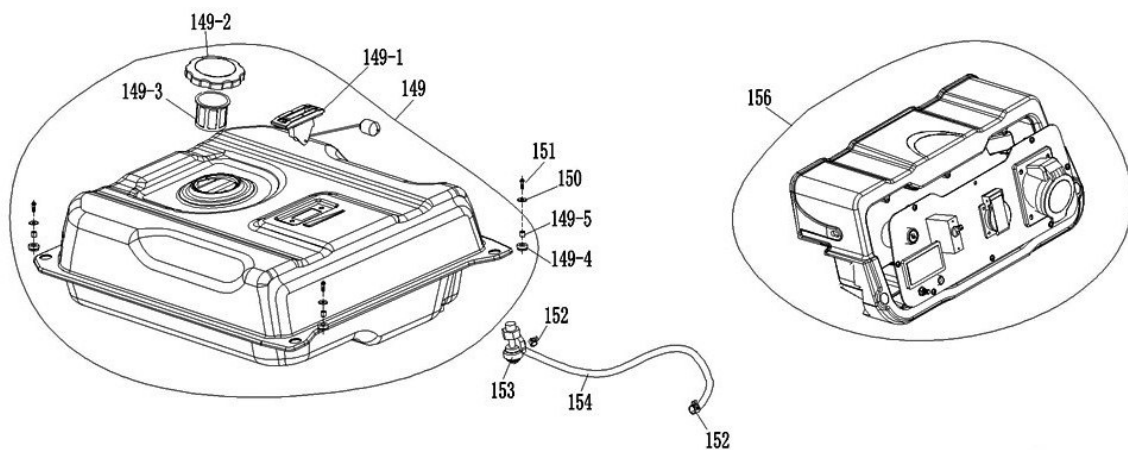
Spare parts drawing 1 und Spare parts drawing 2 PG-E 60 SEA, PG-E 80 TEA and PG-E 90 SEA
